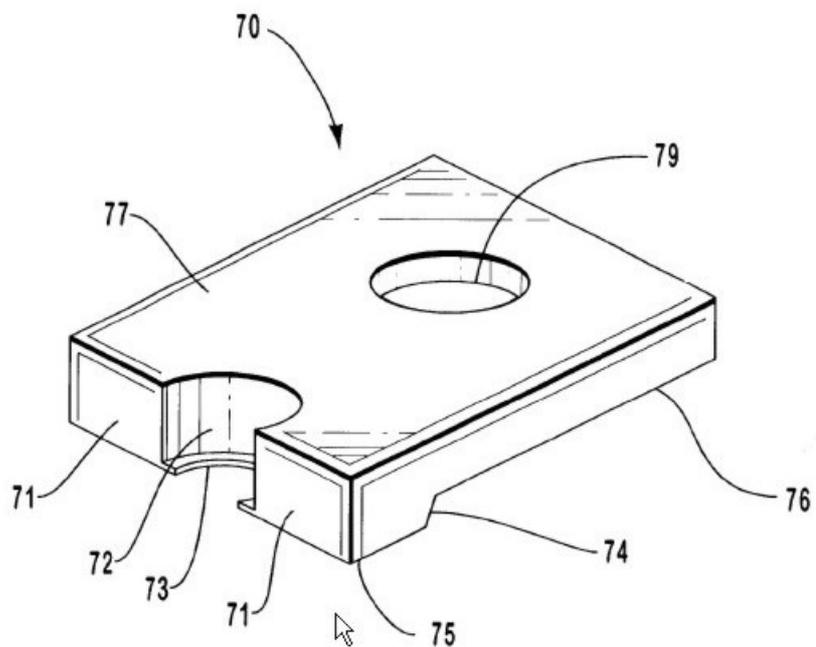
Schematic drawing of the patented bonding jig used for ISO TR 11405.<sup>91</sup>
